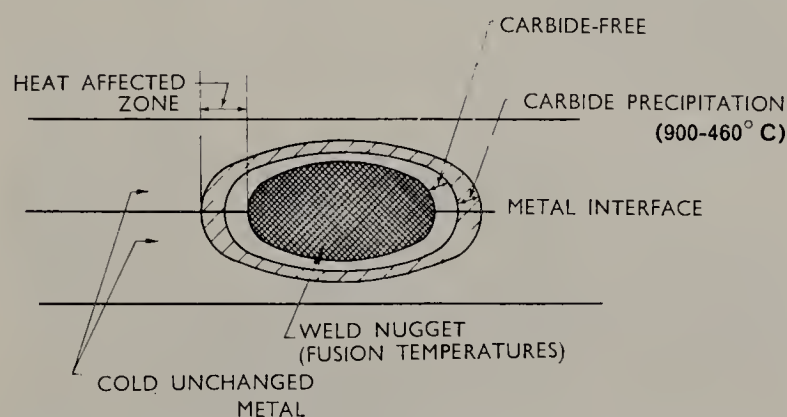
Diagram of a spot weld in 18/8 stainless steel.
